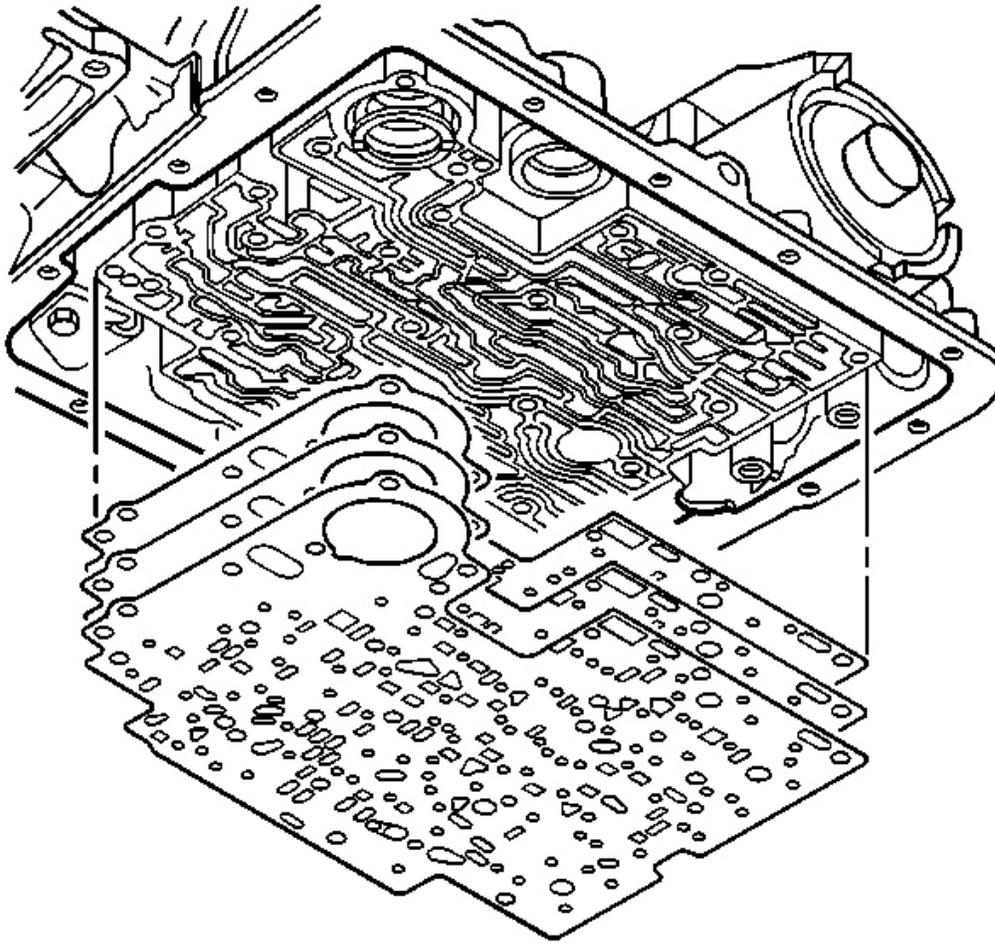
Identifying Spacer Plate, Valve Body Gasket & Transmission Case Gasket
